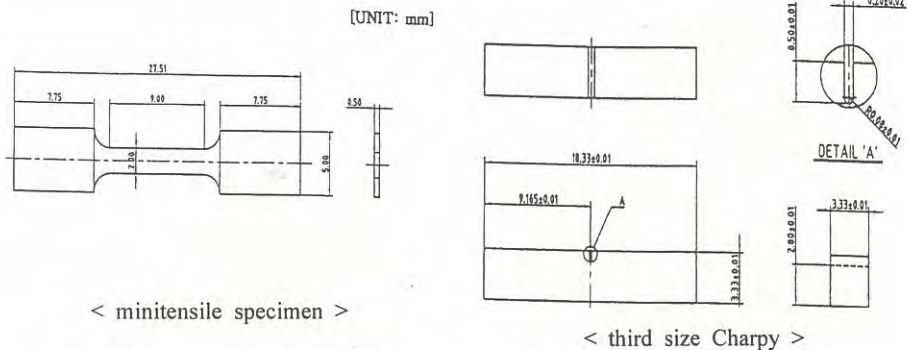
Configuration of specimens used for tensile and fracture toughness testing.
